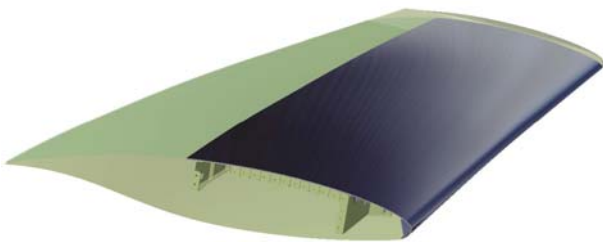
Portboard Smart Wing Demonstrator Article with Integrated Large Upper Panel and Leading Edge (SAAB)
